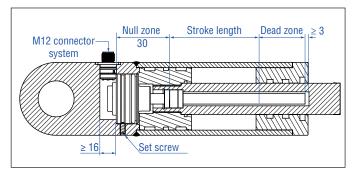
Example of In-Cylinder assembly with M12 connector system
